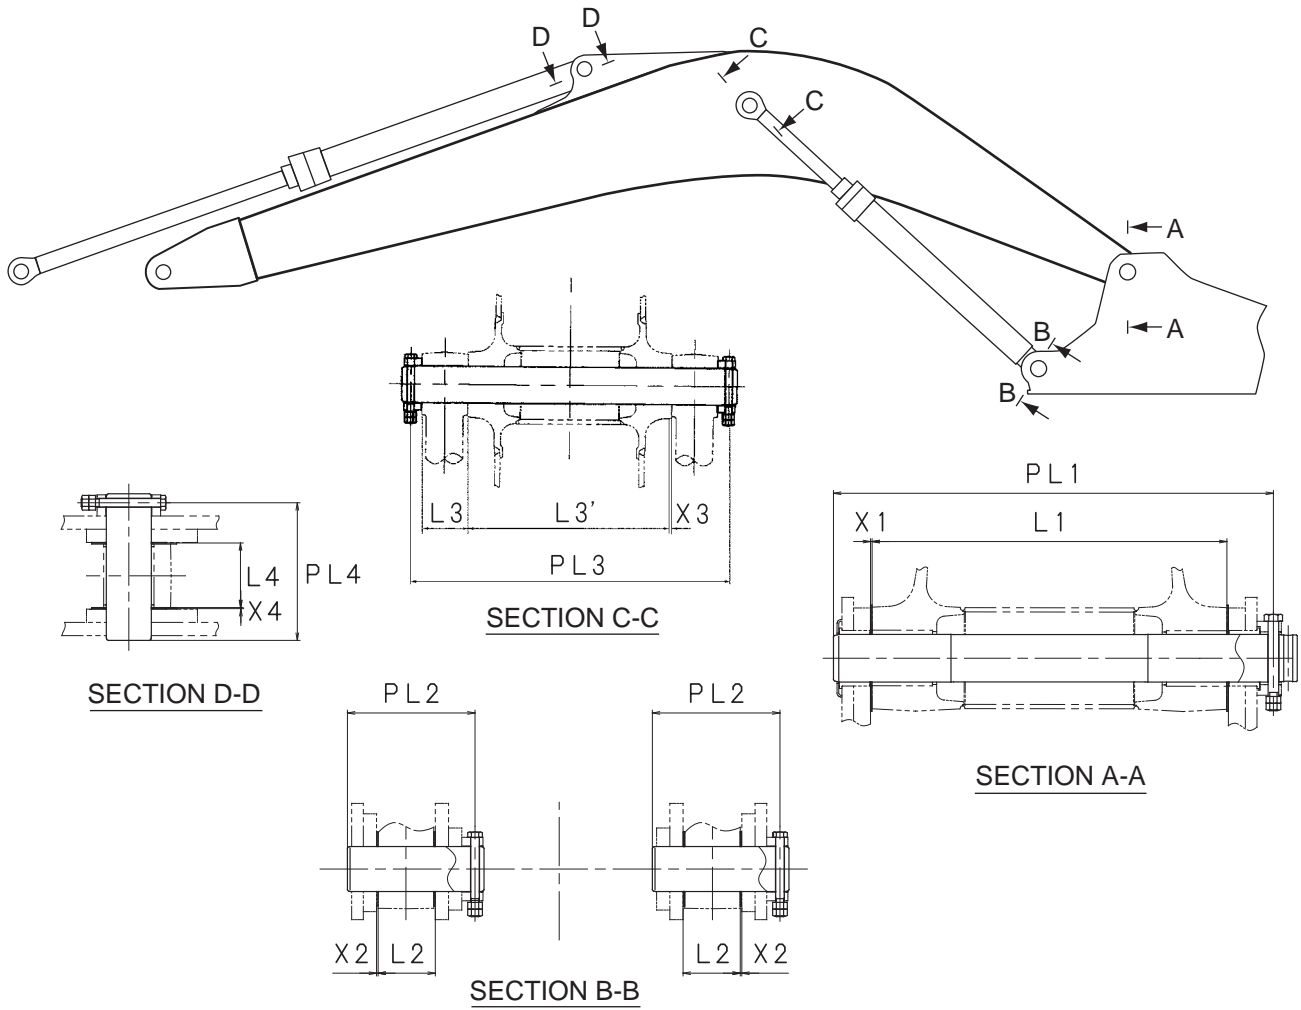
Clearance in thrust direction on the boom cylinder installation section
